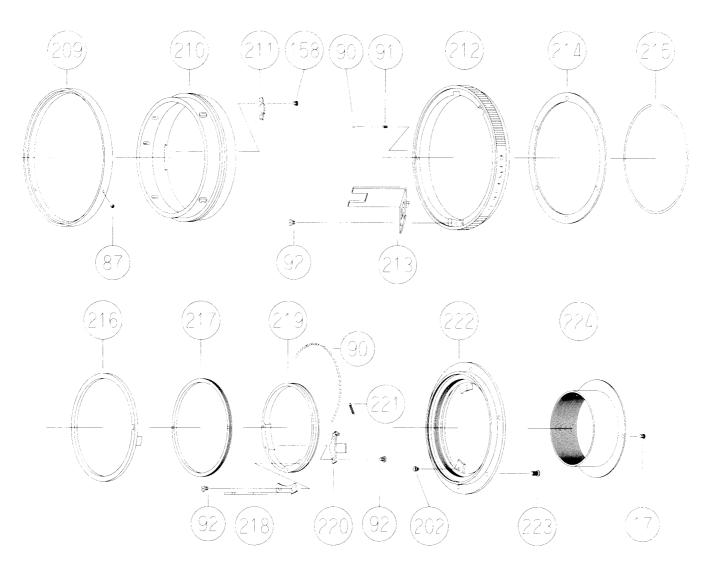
Pentax Mount Assembly (Ref. 530)
